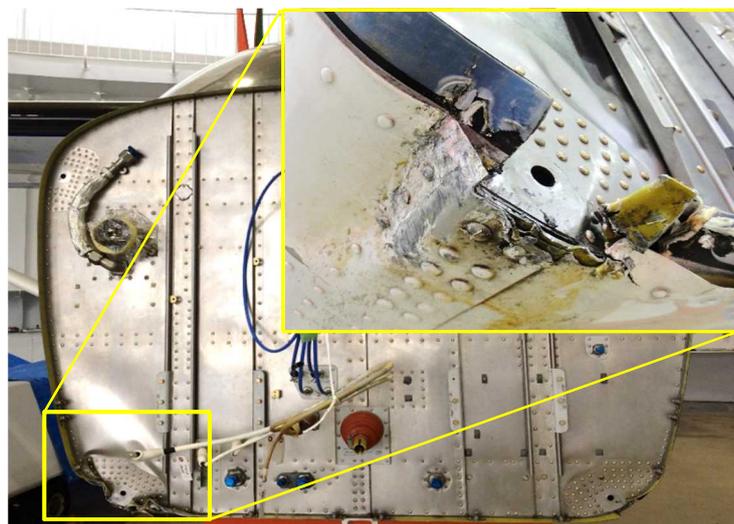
Damaged area at the lower engine firewall (right-side)
